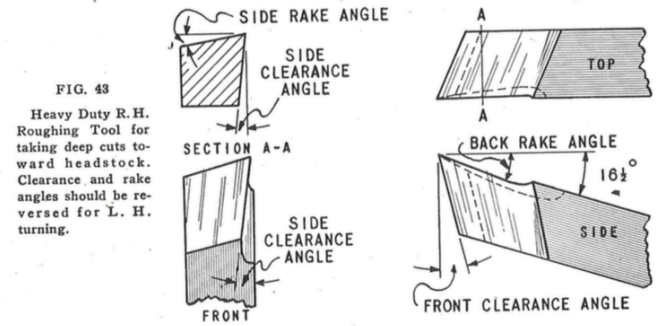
Heavy Duty R. H. Roughing Tool for taking deep cuts toward headstock. Clearance and rake angles should be reversed for L. H. turning.
